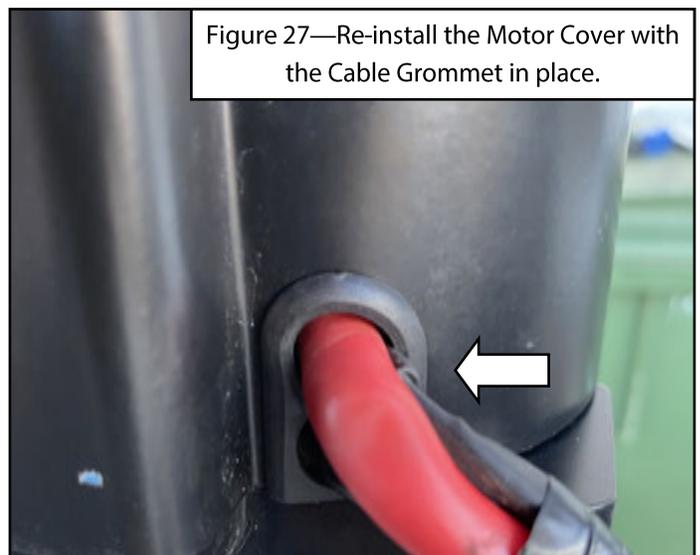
Re-install the Motor Cover with the Cable Grommet in place.
